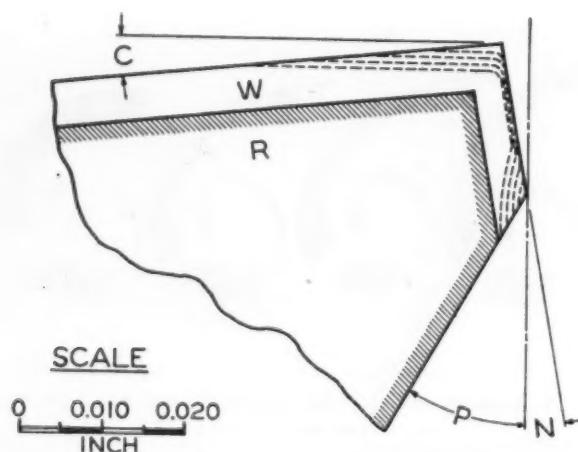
ENLARGED SECTION OF CARBIDE CUTTING EDGE WITH DOUBLE RADIAL RAKE ANGLES, ILLUSTRATING SUCCESSIVE STAGES OF WEAR, AND ECONOMICAL REGRINDING
